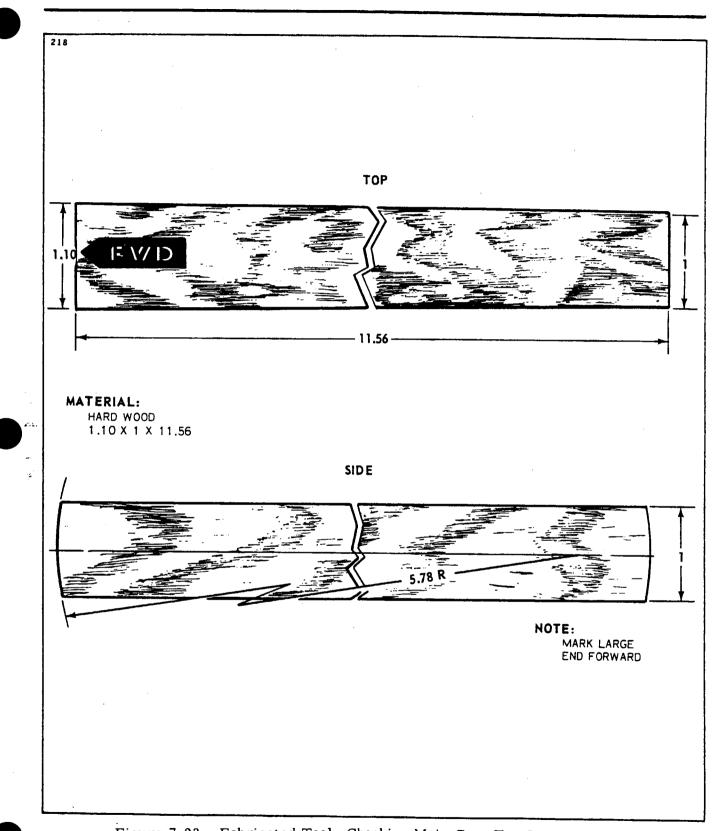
Fabricated Tool, Checking Main Gear Toe-In Adjustment
